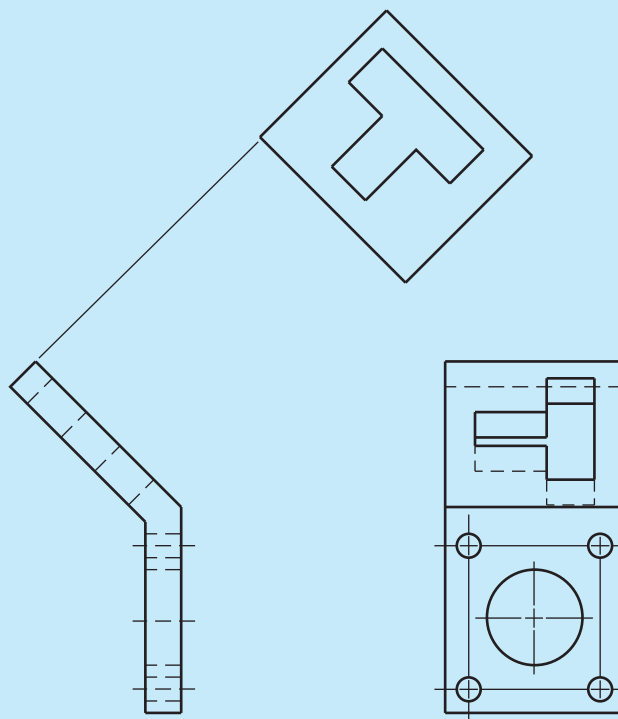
Final layout with partial auxiliary view (dimensions not included). © Cengage Learning 2012
